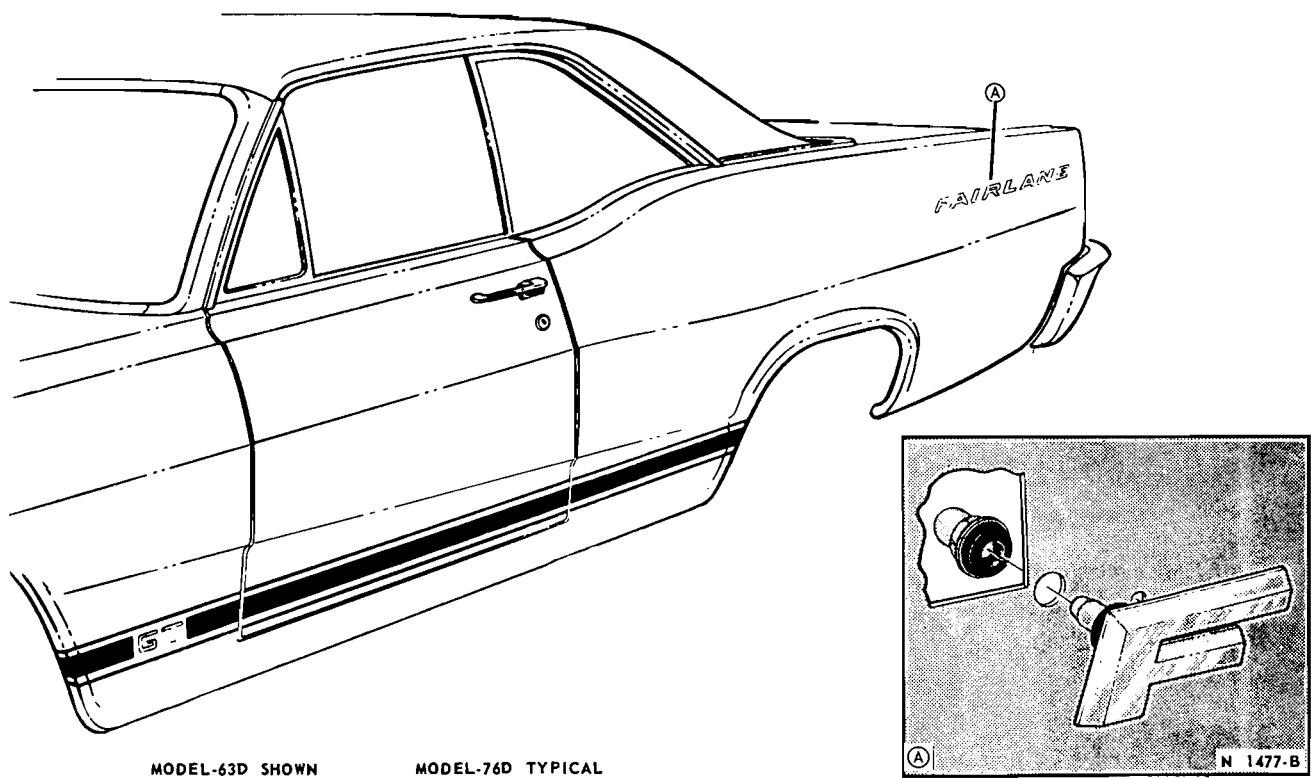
Fairlane Exterior Side Mouldings—Models 63D, 76D
